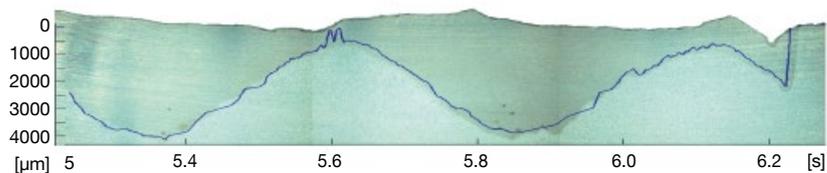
Section of a laser welded workpiece with a sine-modulated laser power. At low power, the keyhole collapses, leading to unsteady measuring signals of the penetration depth.
